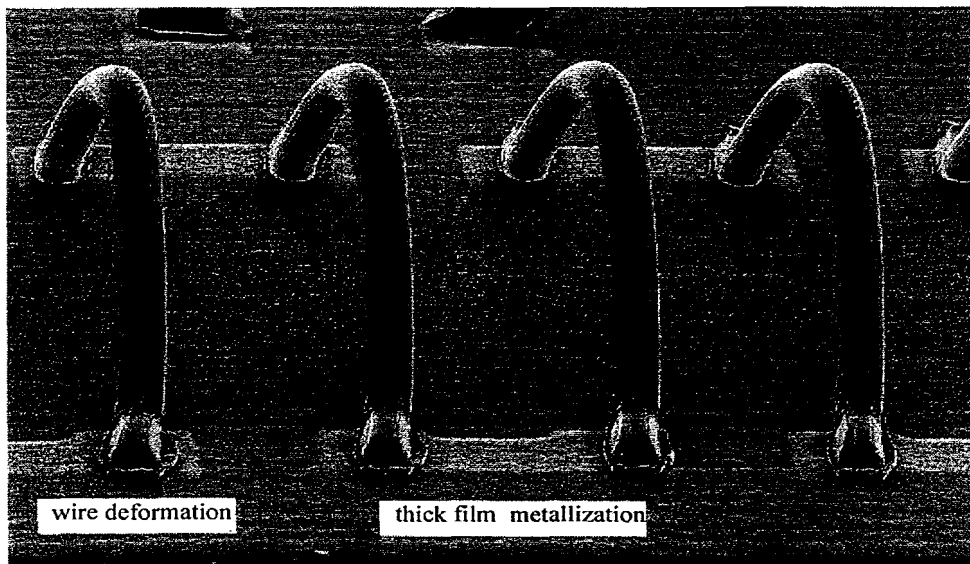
B. End View of 0.010 Inch Diameter Aluminum Wire Bonds
